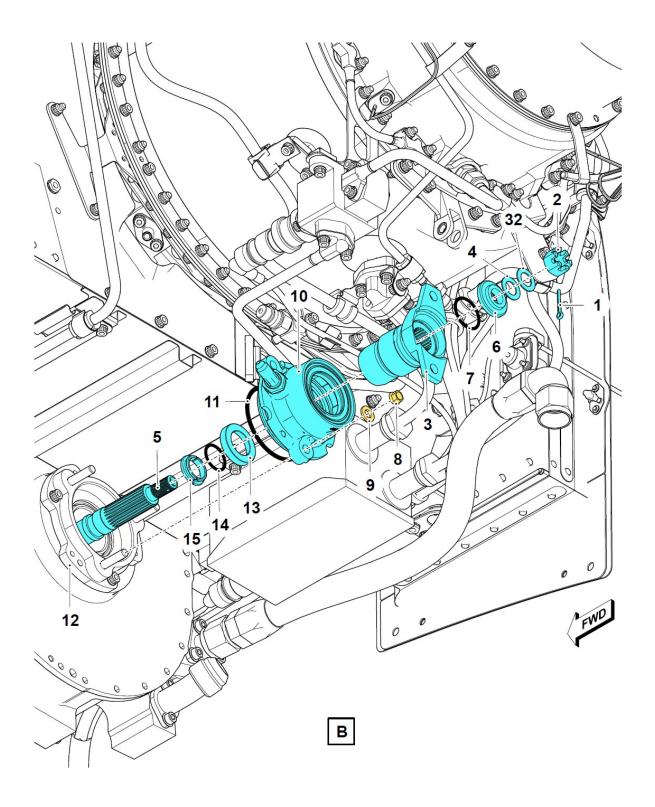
Freewheel Aft Support Assembly (sheet 1 of 2)
